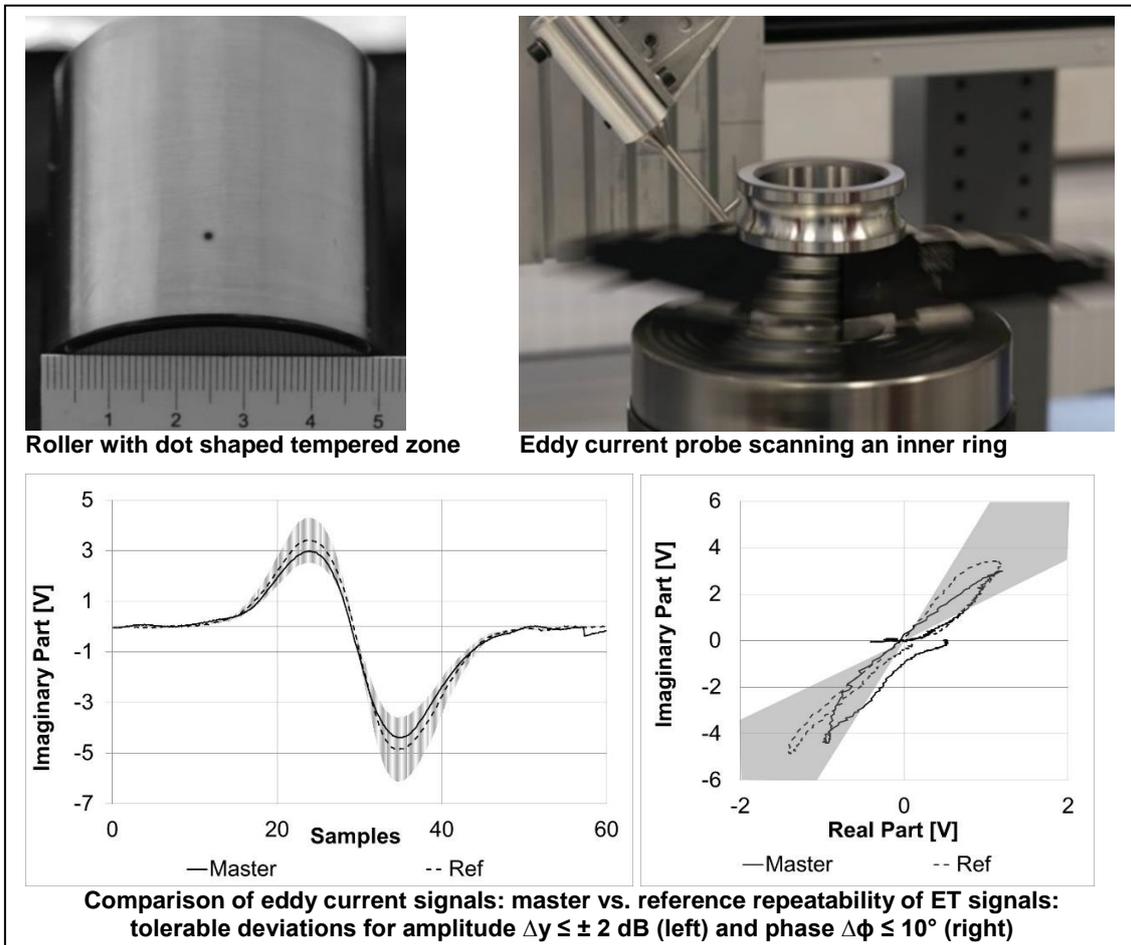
Reference Blocks for Eddy current testing of roller bearings
